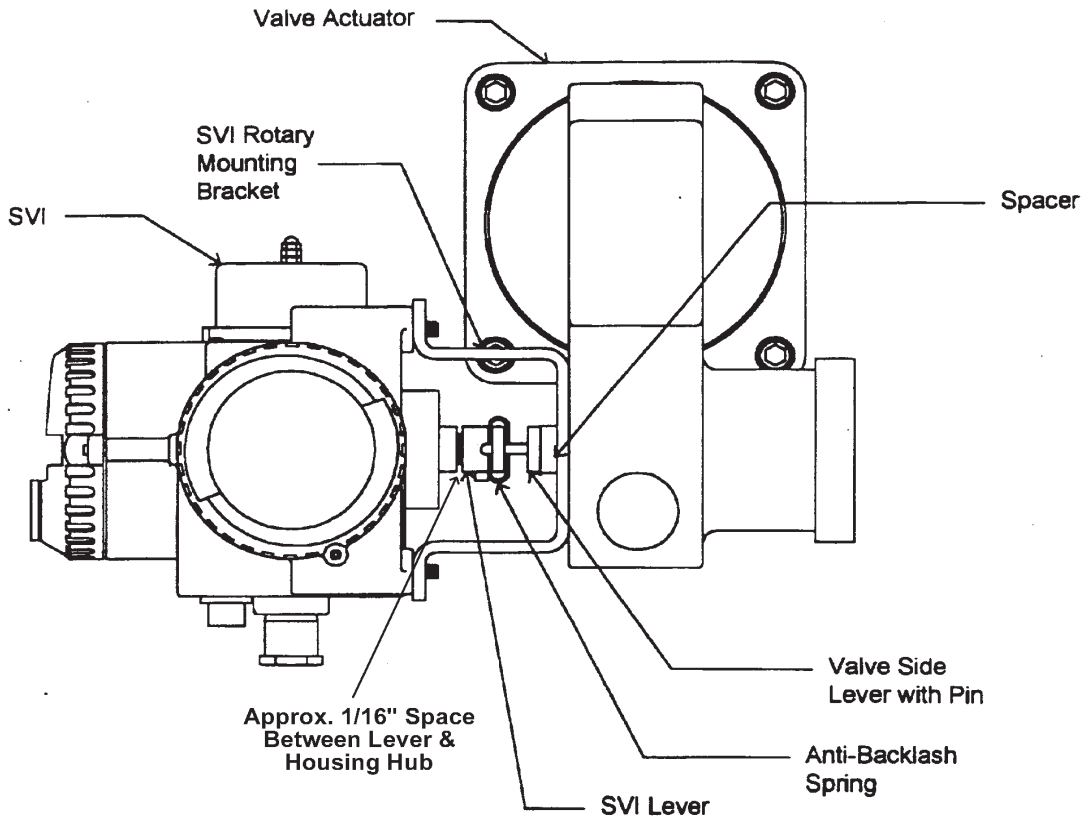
SVI Rotary Mounting Bracket with Valve Side Lever on Ball and Butterfly Valves
